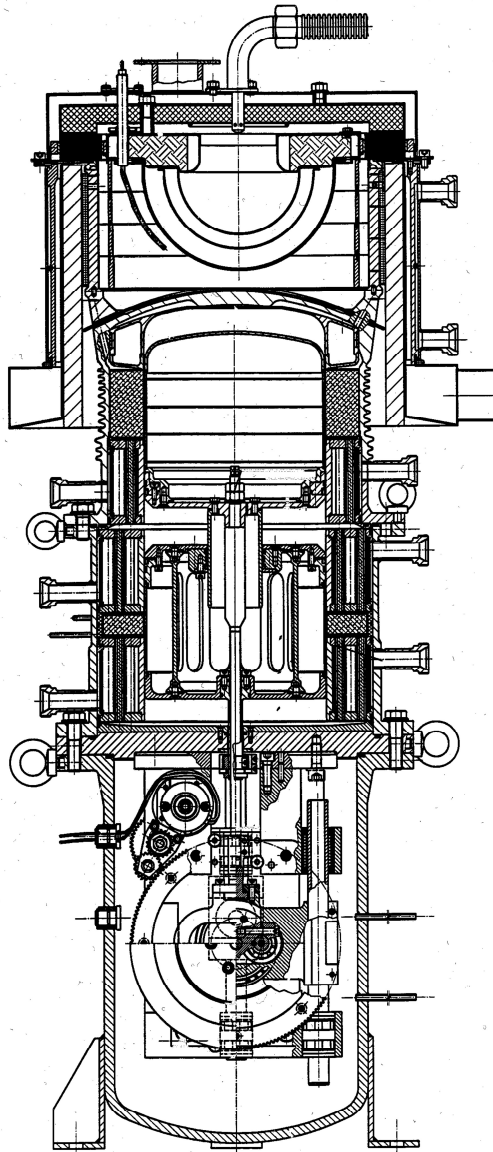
Engineering drawing of the 20 KW BE Vuilleumier heat pump [3].
